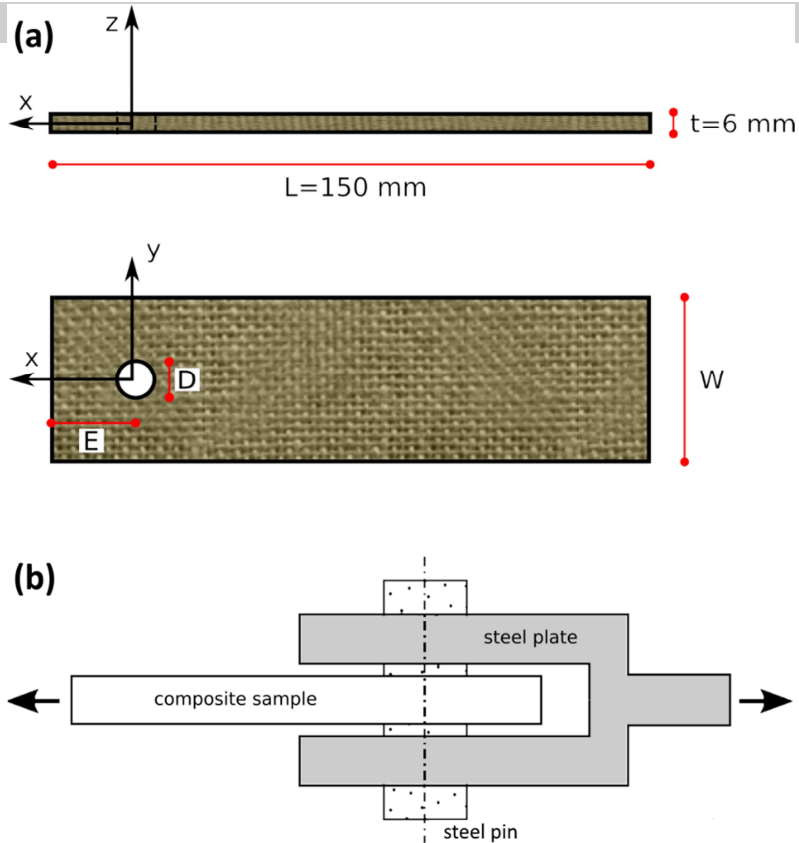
(a) Geometry of bearing specimens and (b) schematization of bearing test set-up
